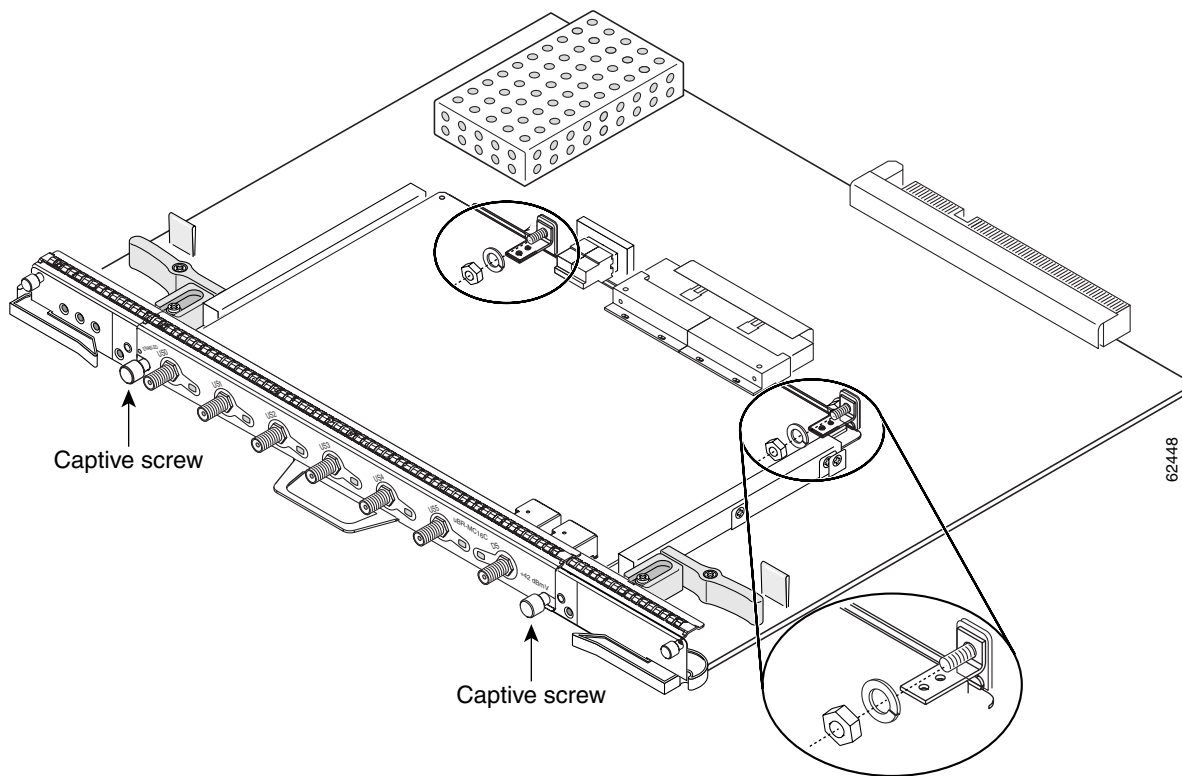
Ejecting the Cable Interface Line Card from the Adapter Card
